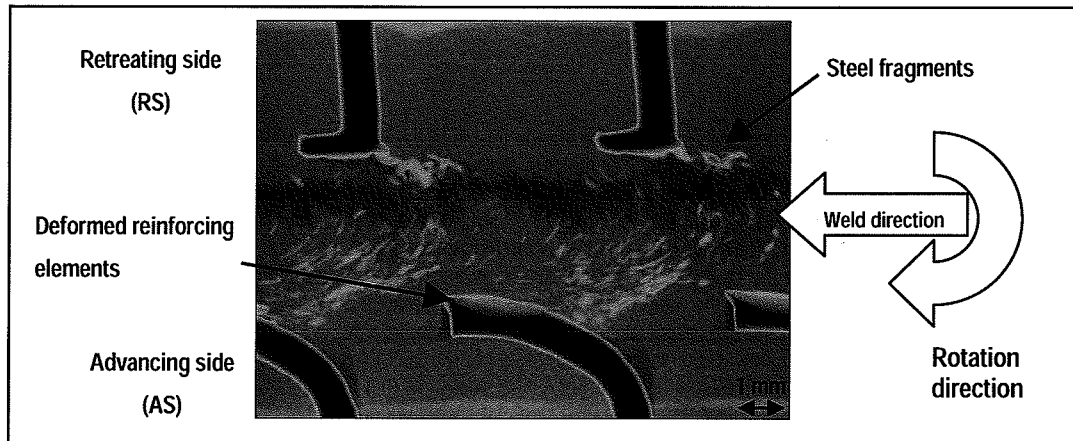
$\mu$ CT photo of the welding zone (top view)
